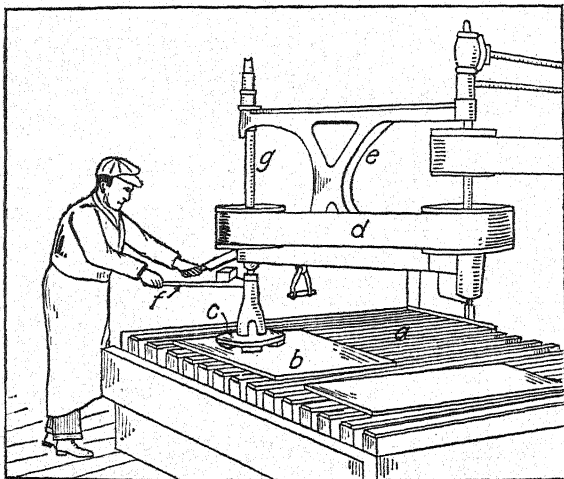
Marble-polishing machine. *a.* Polishing bench. *b.* Marble slab. *c.* Carborundum head. *d.* Lower drive belt. *e.* Front polisher frame. *f.* Handle. *g.* Front hollow shaft. (Courtesy of Lincoln Iron Works.)
